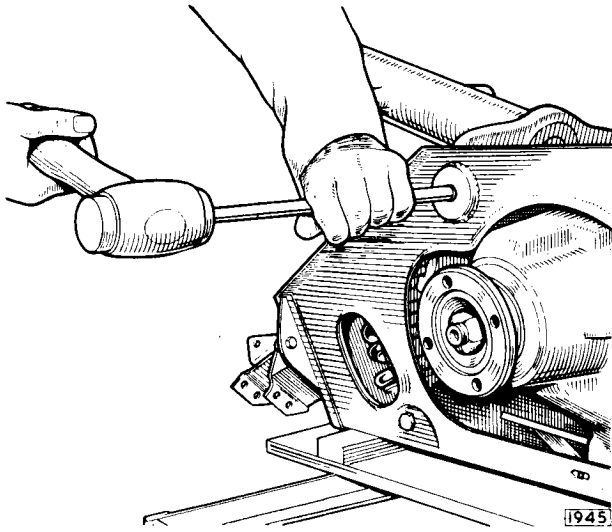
Drifting the inner fulcrum shaft into position and displacing the dummy shafts
